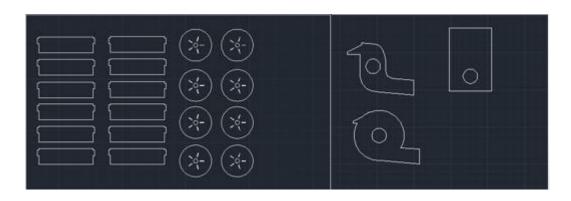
AutoCAD Drawings of the components of the Paddle Wheel prototypes for the laser cutter
